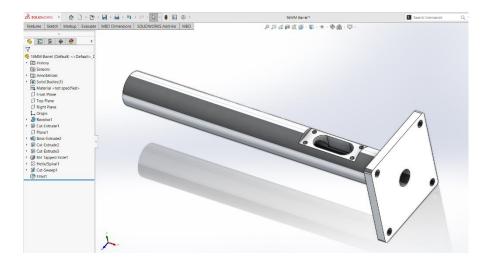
Design of the barrel. Source: (Robotdigg Manufacturer)
